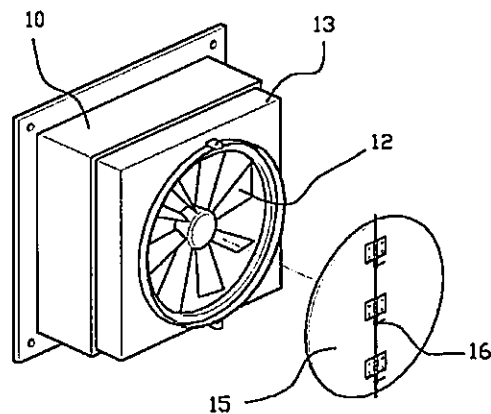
shows an exploded perspective view of a ventilator according to the present device.
